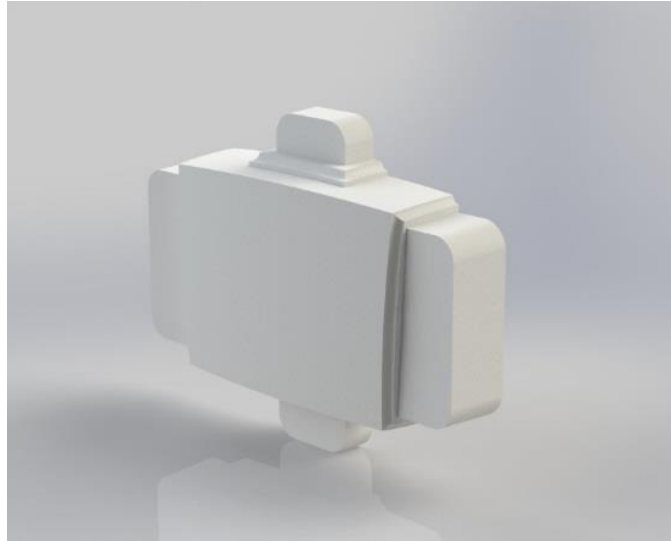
An image of a single halve of the pattern used to create the sand cast infill mallet.
